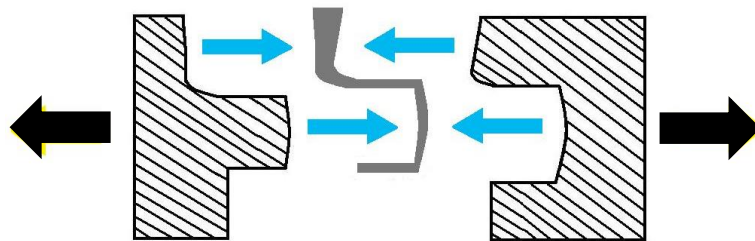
Basic permanent mold is open and solidified casting is ejected
